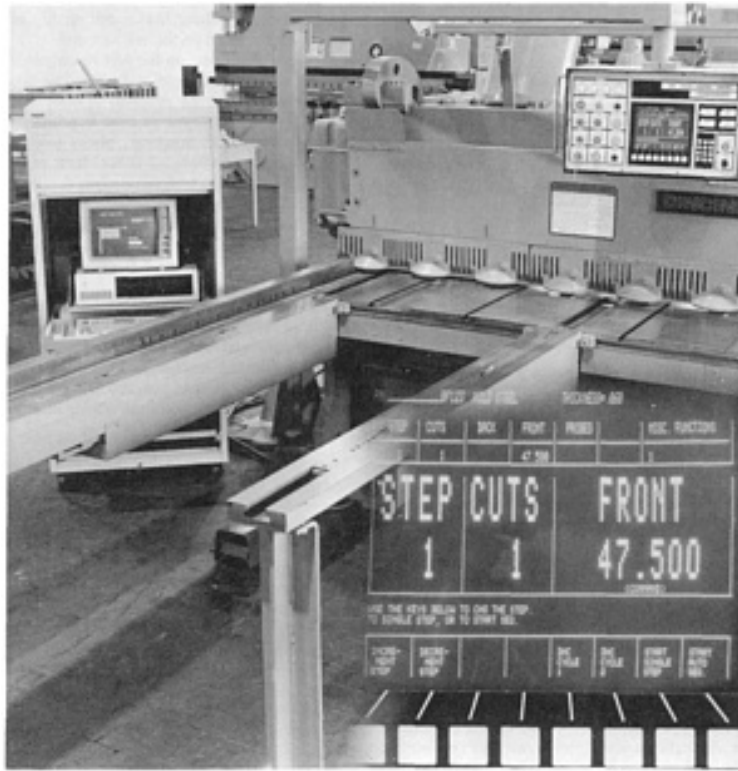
MICROPROCESSOR-CONTROLLED SHEARING MACHINE WITH INSET (LOWER RIGHT) SHOWING LED DISPLAY. COURTESY OF CINCINNATI INC.
